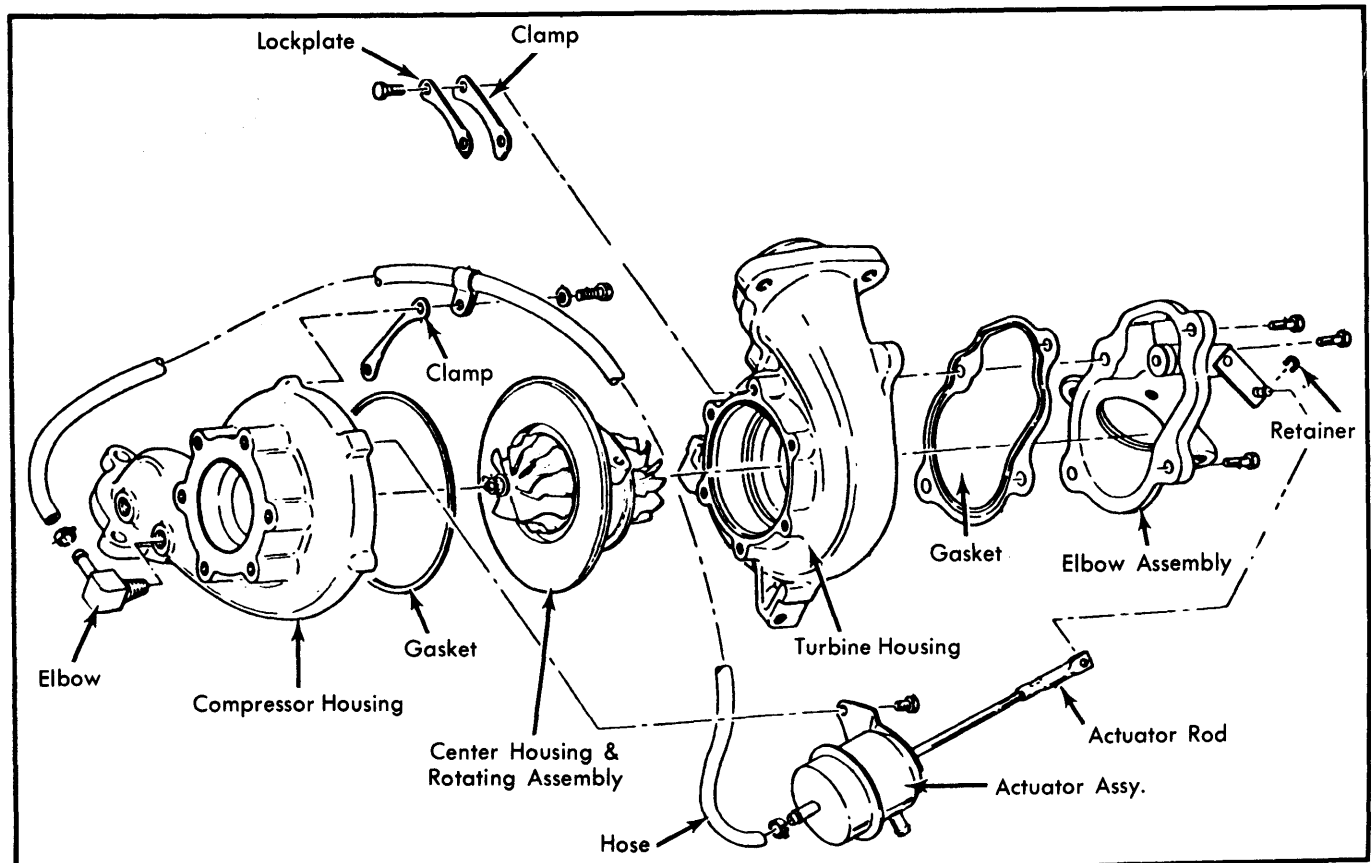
Exploded View of Turbocharging System On GM V6 Engines
